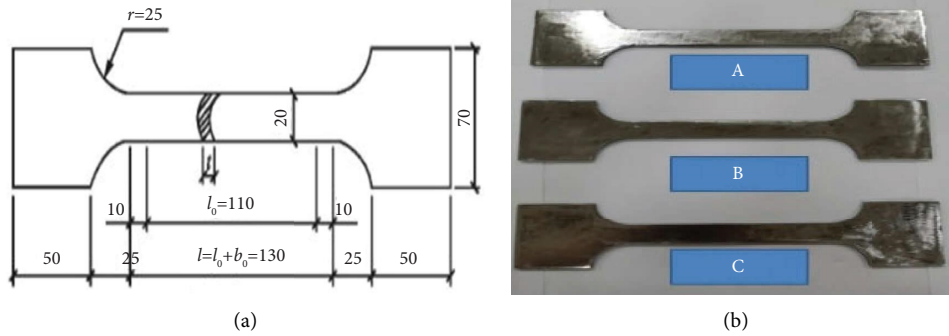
Steel tensile test piece production: (a) tensile specimen size and (b) tensile specimen.
